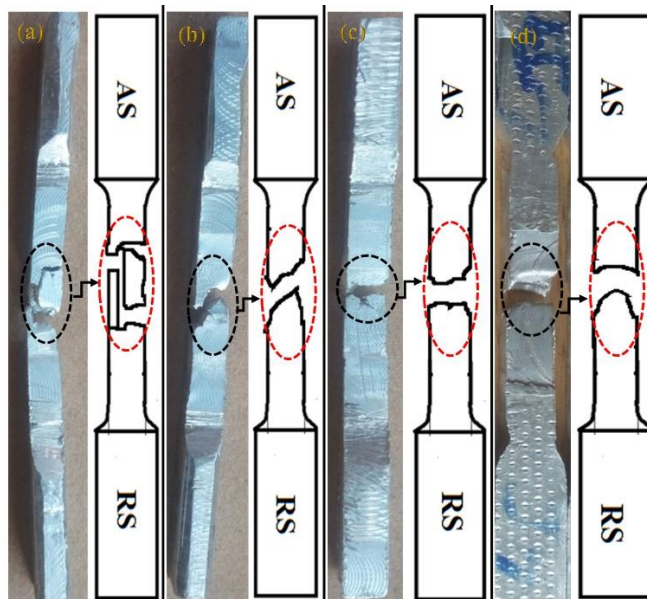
Fracture paths and their equivalent illustrations for the IFSW welds: (a) single-sided weld at 1120 rpm/40 mm/min, (b) single-sided weld at 710 rpm/40 mm/min, (c) double-sided weld at 1120 rpm/40 mm/min, (d) double-sided weld at 710 rpm/40 mm/min
